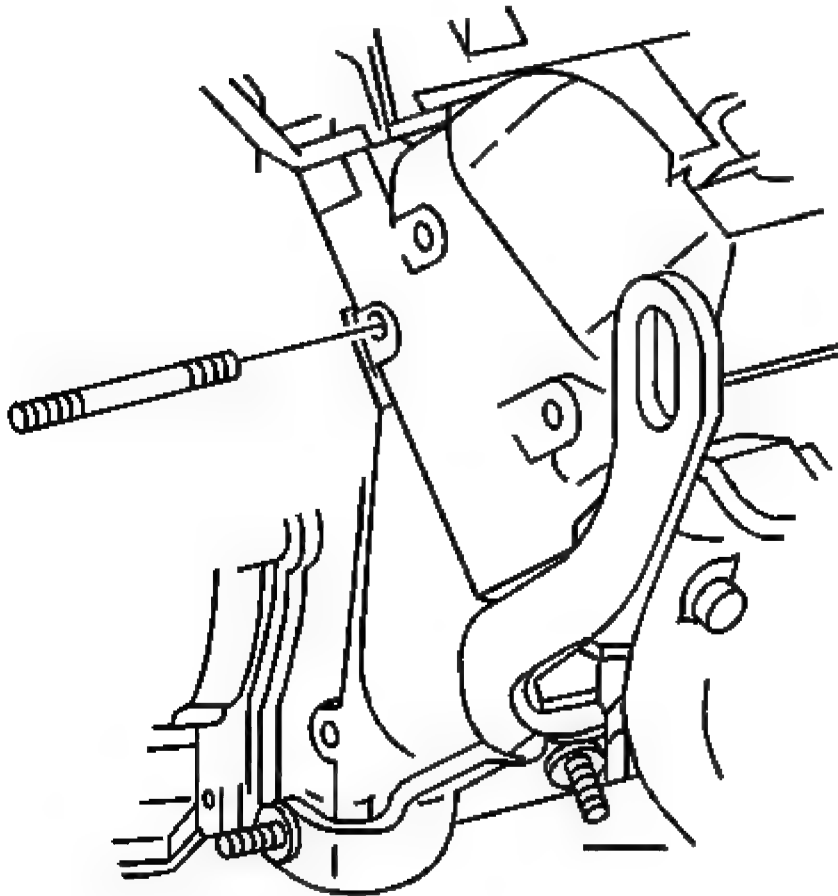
Locating Power Steering Pump Mounting Bracket Stud
